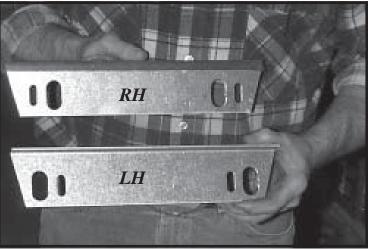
Top - plenum closure door RH angle has weather stripping. Bottom - plenum closure door LH angle.
